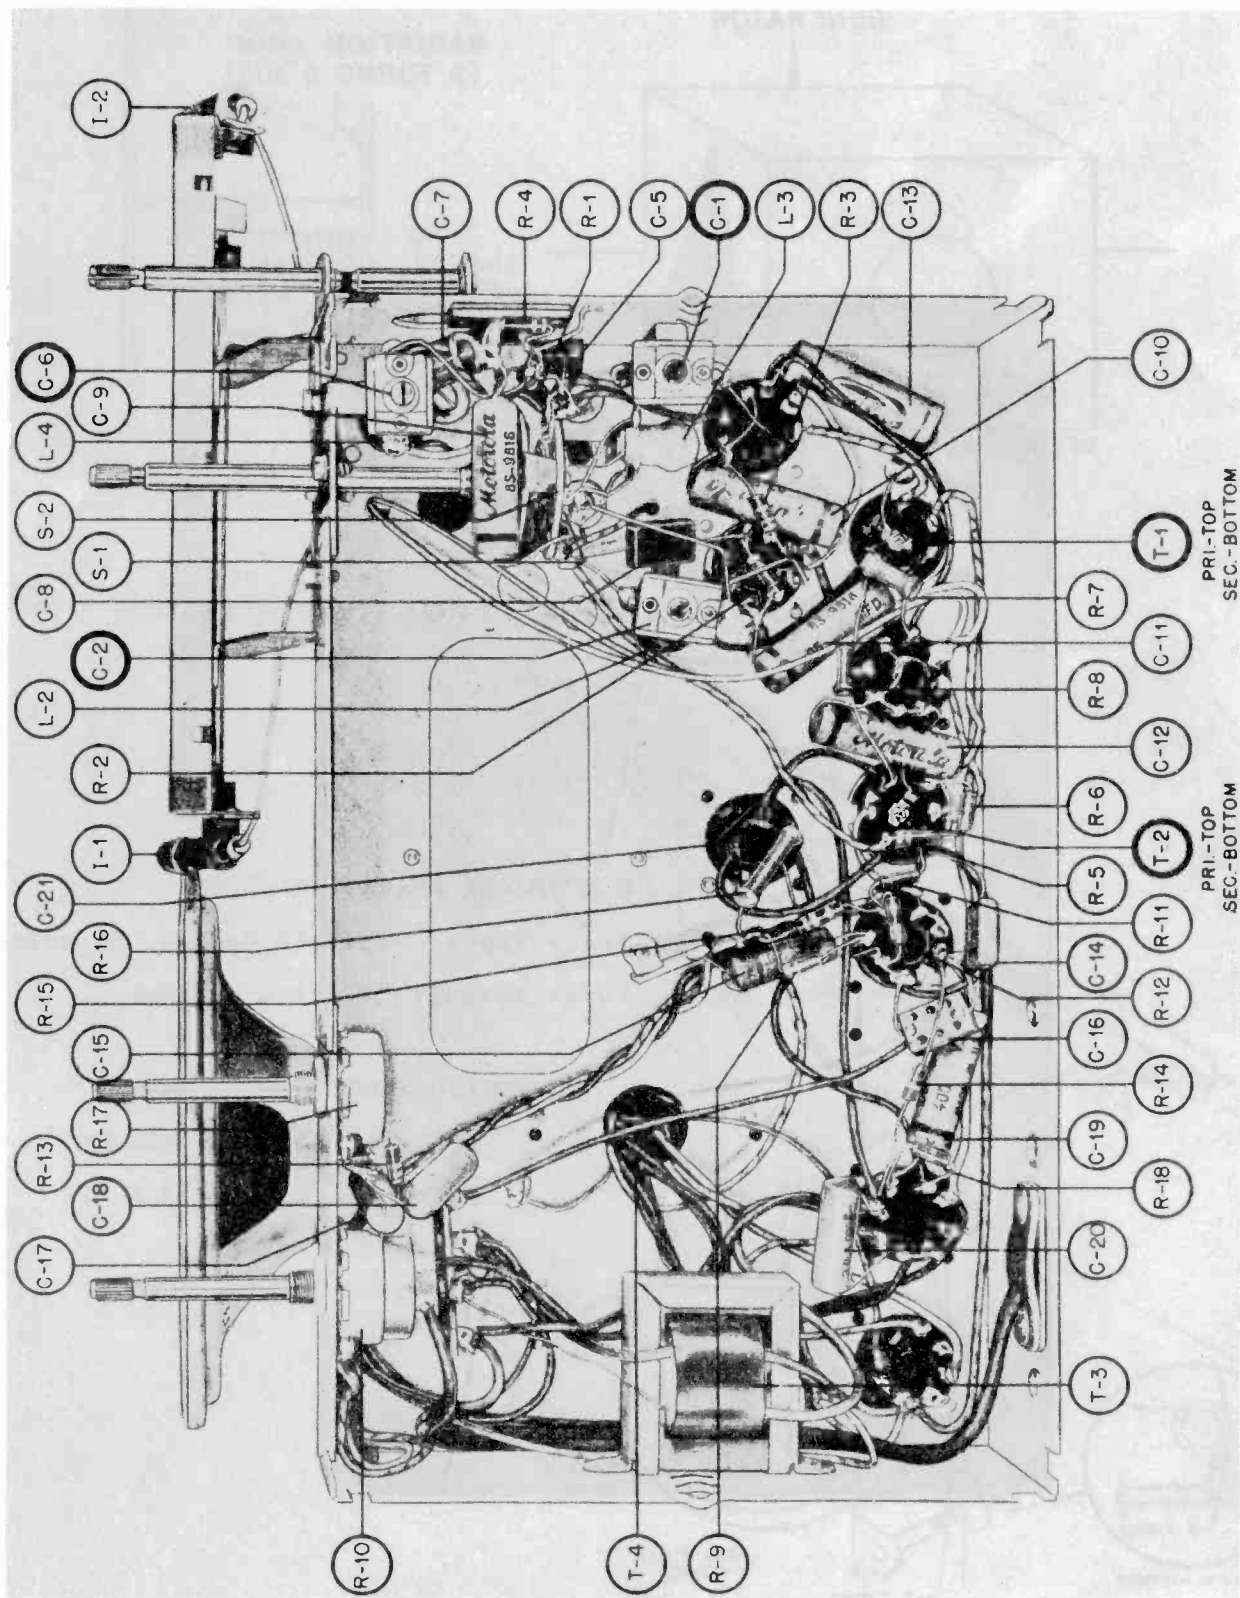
TUBE & TRIMMER LOCATION DETAIL
